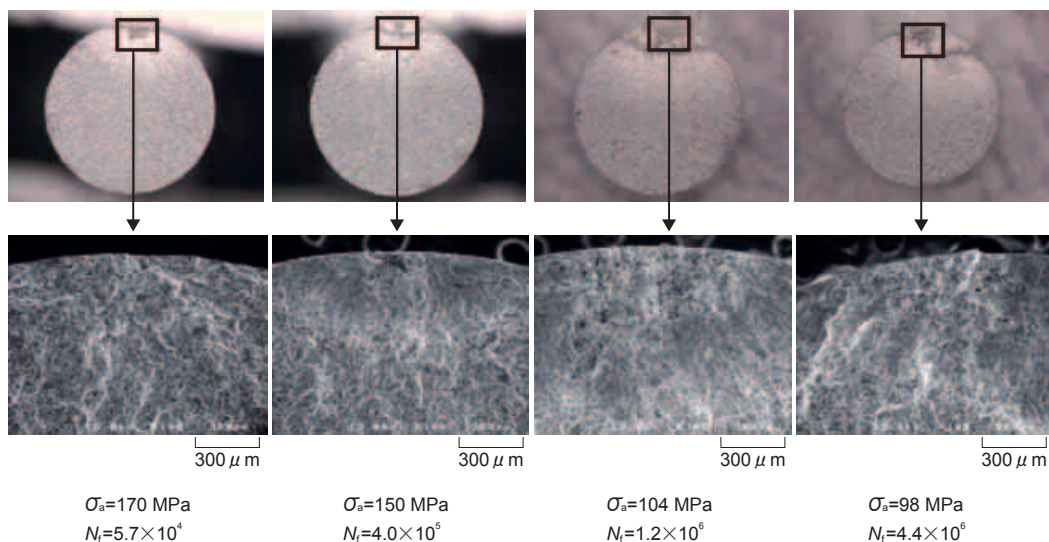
SEM micrographs of fracture surface (Surface casting defect)
